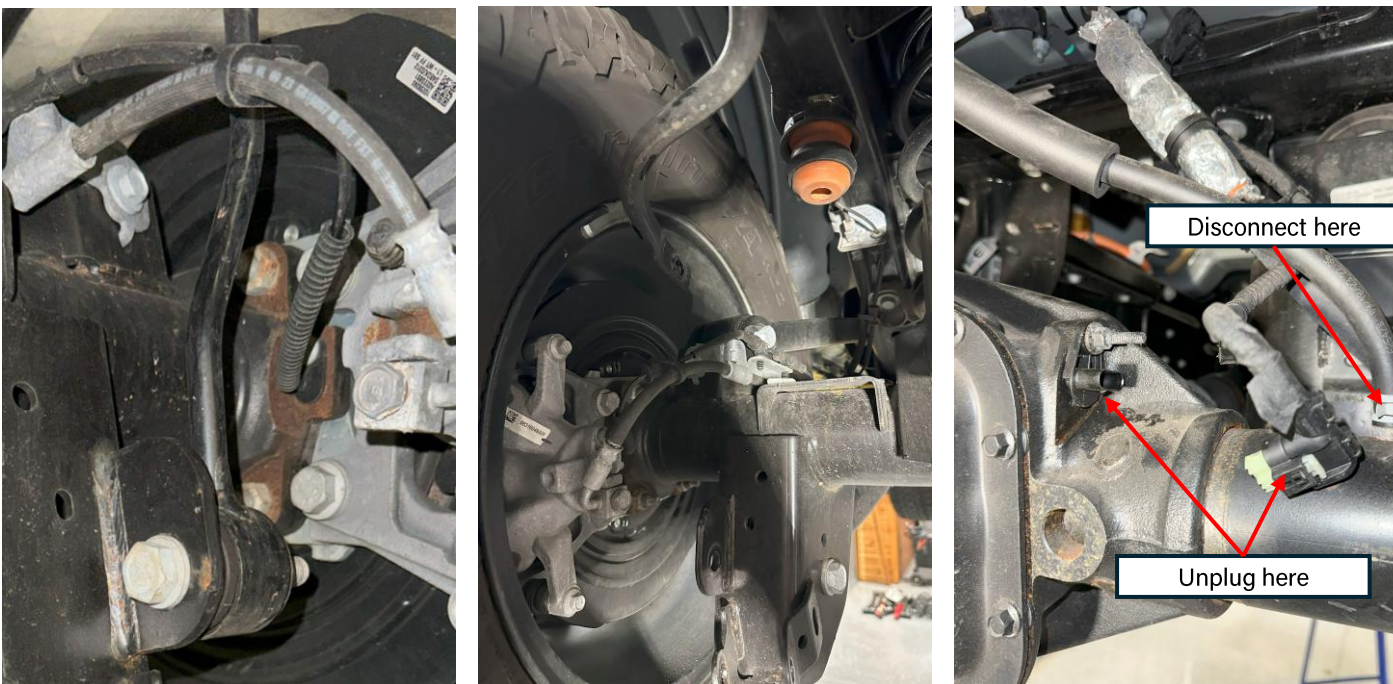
Rear sway bar end link before and after removal, and differential wiring harness removed
